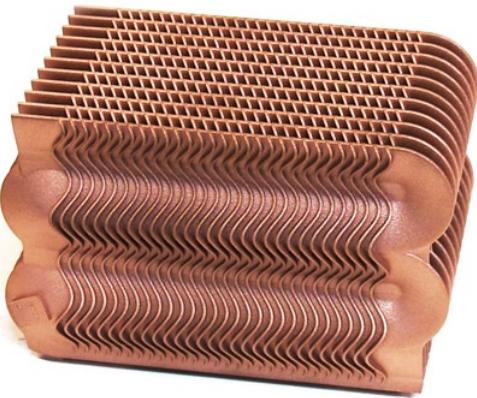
A Copper Part Printed by 3T RPD Using DMLS.
